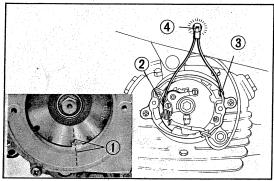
D Breaker arm retaining screws 2 Adjusting position
